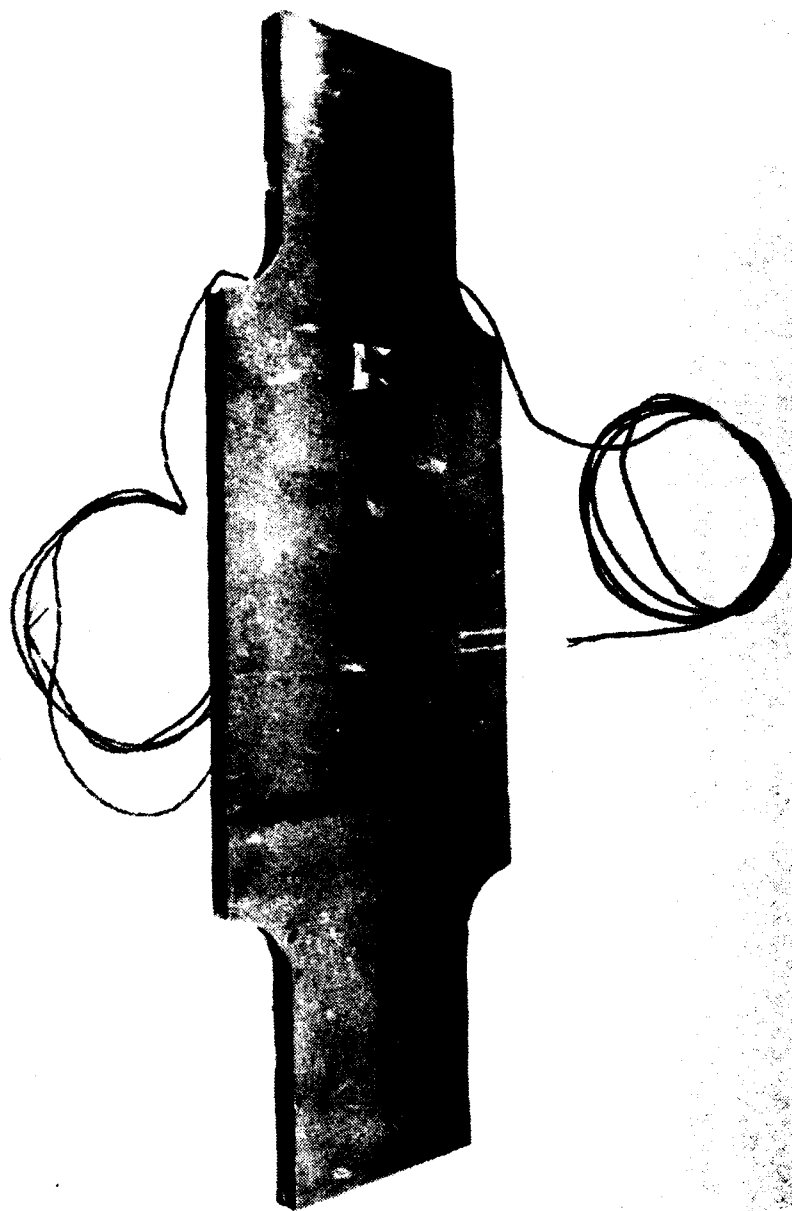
BACK-TO-BACK BONDED LAP JOINT SPECIMENS
